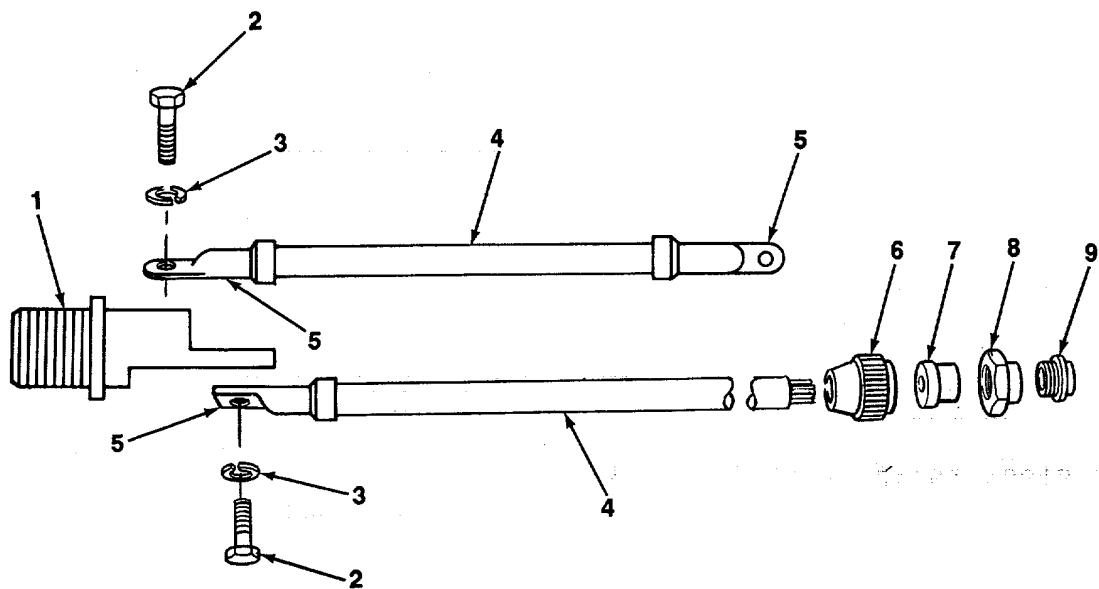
MASTER RELAY ELECTRICAL LEAD.
